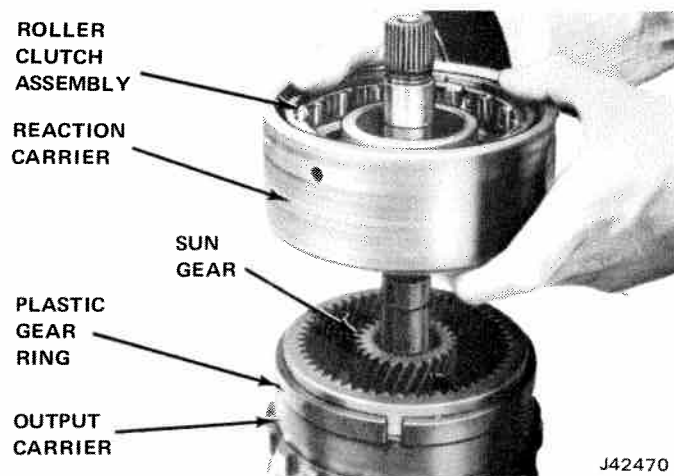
Removing Reaction Carrier and Roller From Output Carrier Clutch
